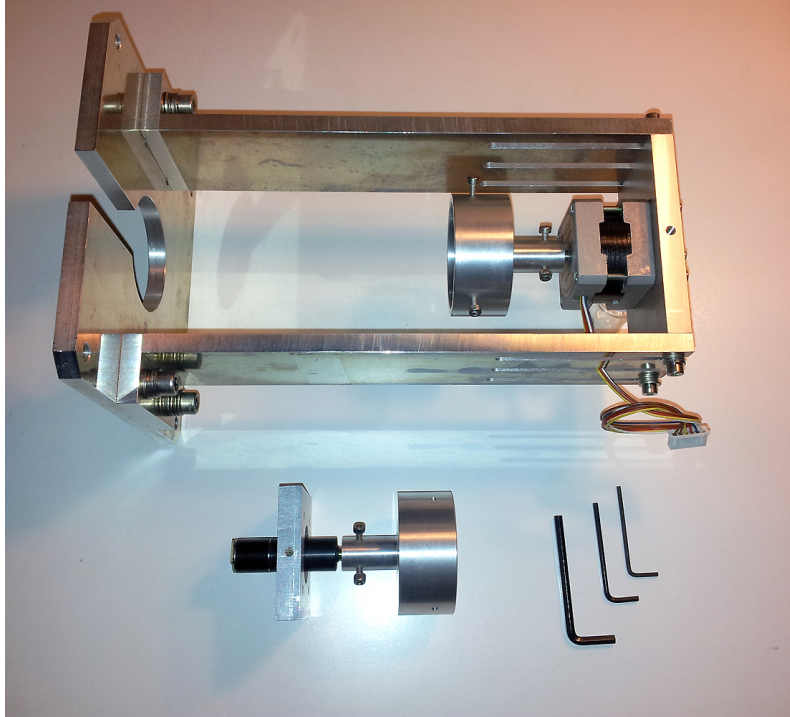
The assembly spread on the table. The interchangeable plate is provided with standard market stepper motor. This same plate can be directly used, with the help of an adapting collar, with an *Arsape* motor, shown bellow.
